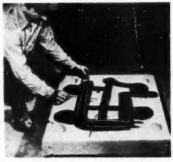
Tubing is held in place in the mold by Monel Chaplets.
